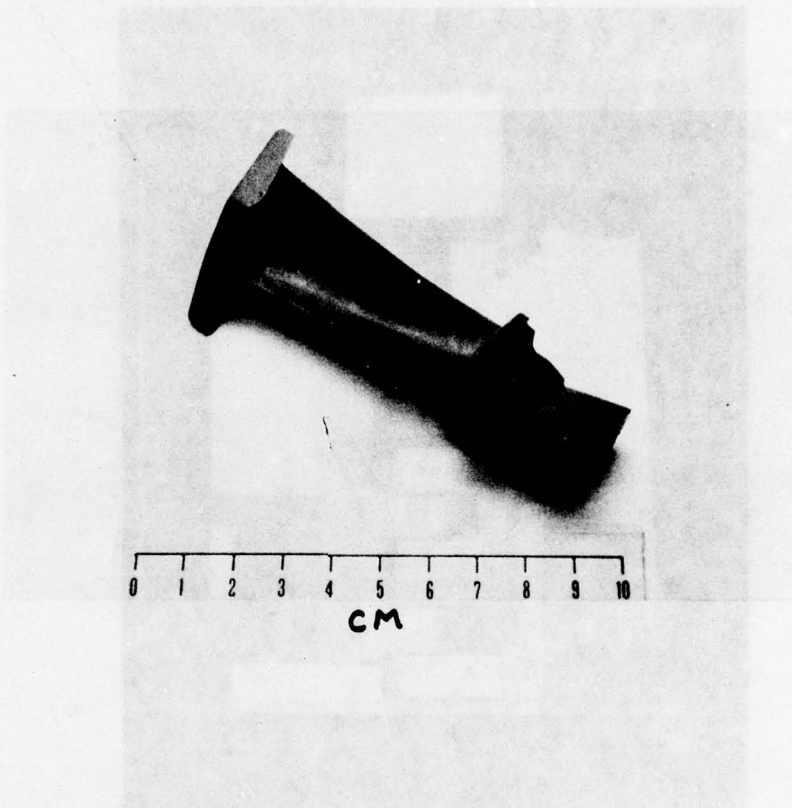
Injection molded Sialon-wax JT79 turbine blade.
